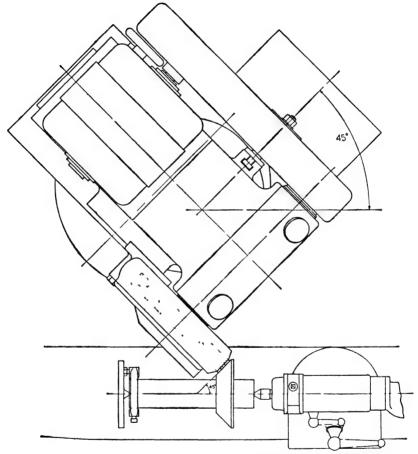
Method of Obtaining Extra Fine Feed on Universal Grinding Machine
